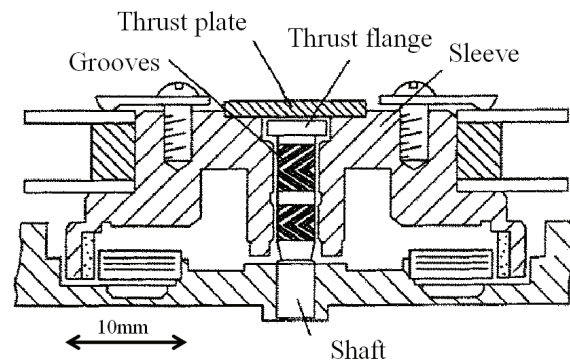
Example of hydrodynamic grooved bearings for HDD spindle motor
